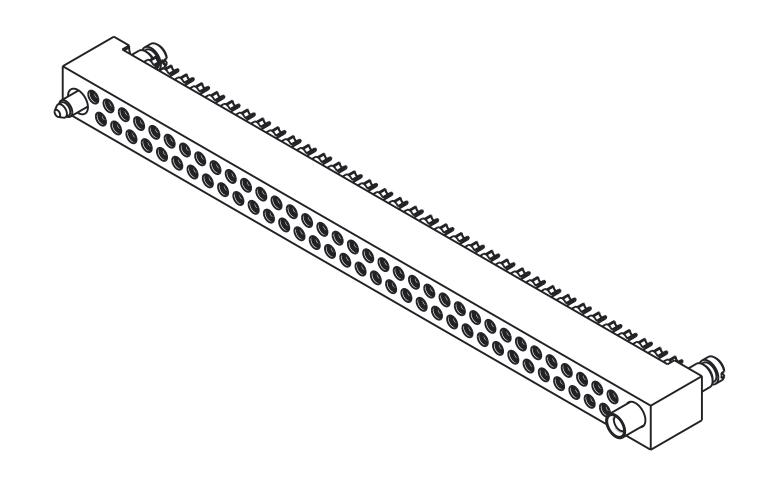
RECEPTACLE CONNECTOR, SOLDER CUP SOCKET CONTACTS
